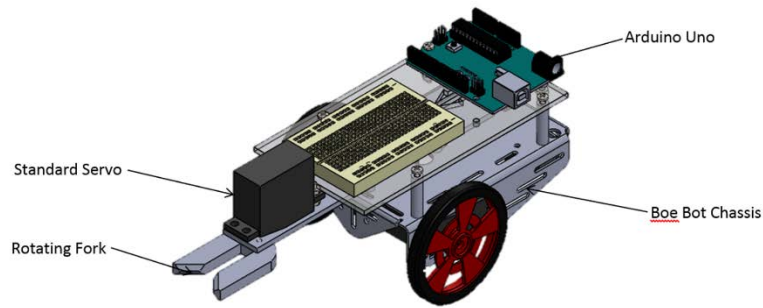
Example of student SolidWorks solid model assembly of an IED ‘Bot design.
